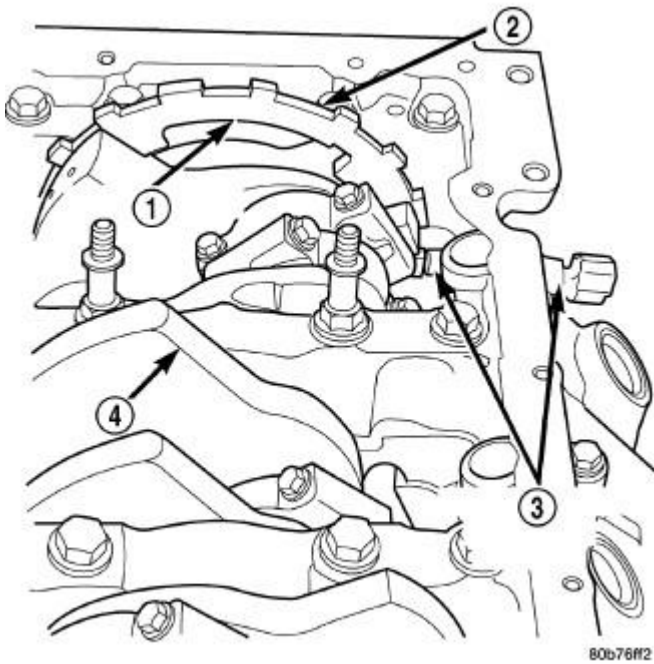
Crankshaft Position Sensor, Engine Crankshaft, And Tonewheel Notches
